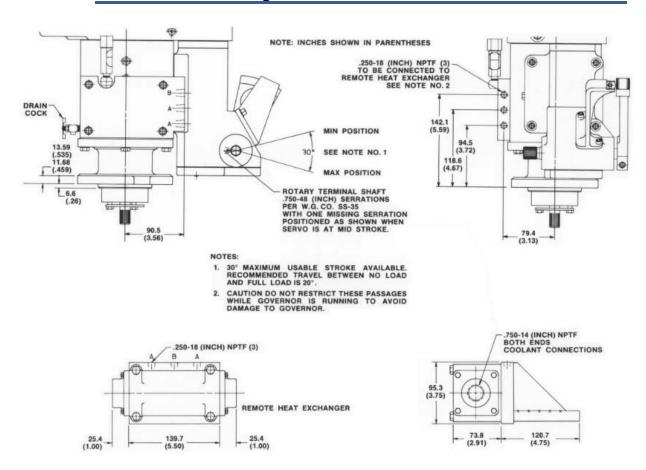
Remote Cooler PG Governor Mounting Plate Detail and Dimensions
